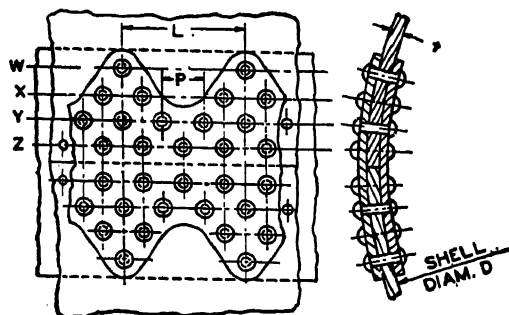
Quadruple-riveted Butt Joint—Longitudinal.
